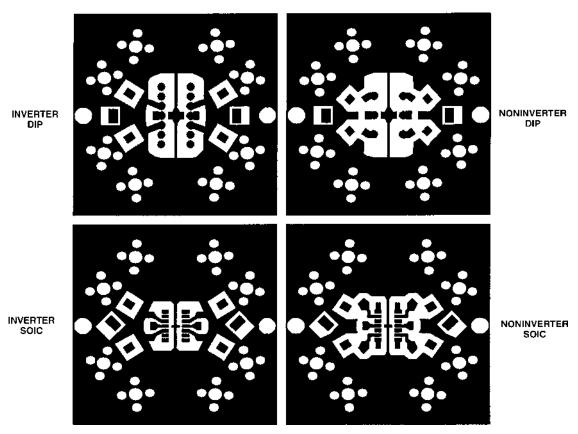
Evaluation Board Layout (Bottom Side, Looking Through the Board)
